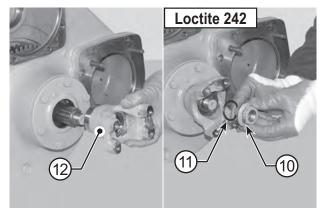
Assemble the flange (12), o-ring (11), and nut (10) using Loctite 242.
